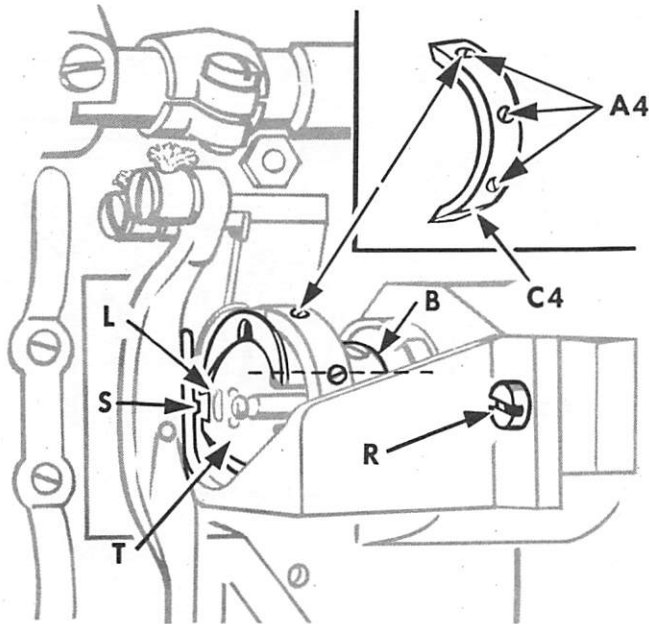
Position of Bobbin Case Holder, in Relation to Hook; Necessary for Removal or Replacement
